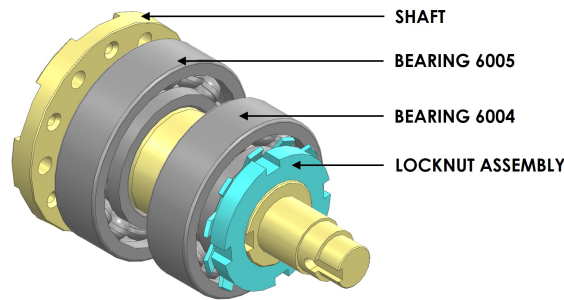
Shaft assembly showing the unmodified Hacker Q150 components
